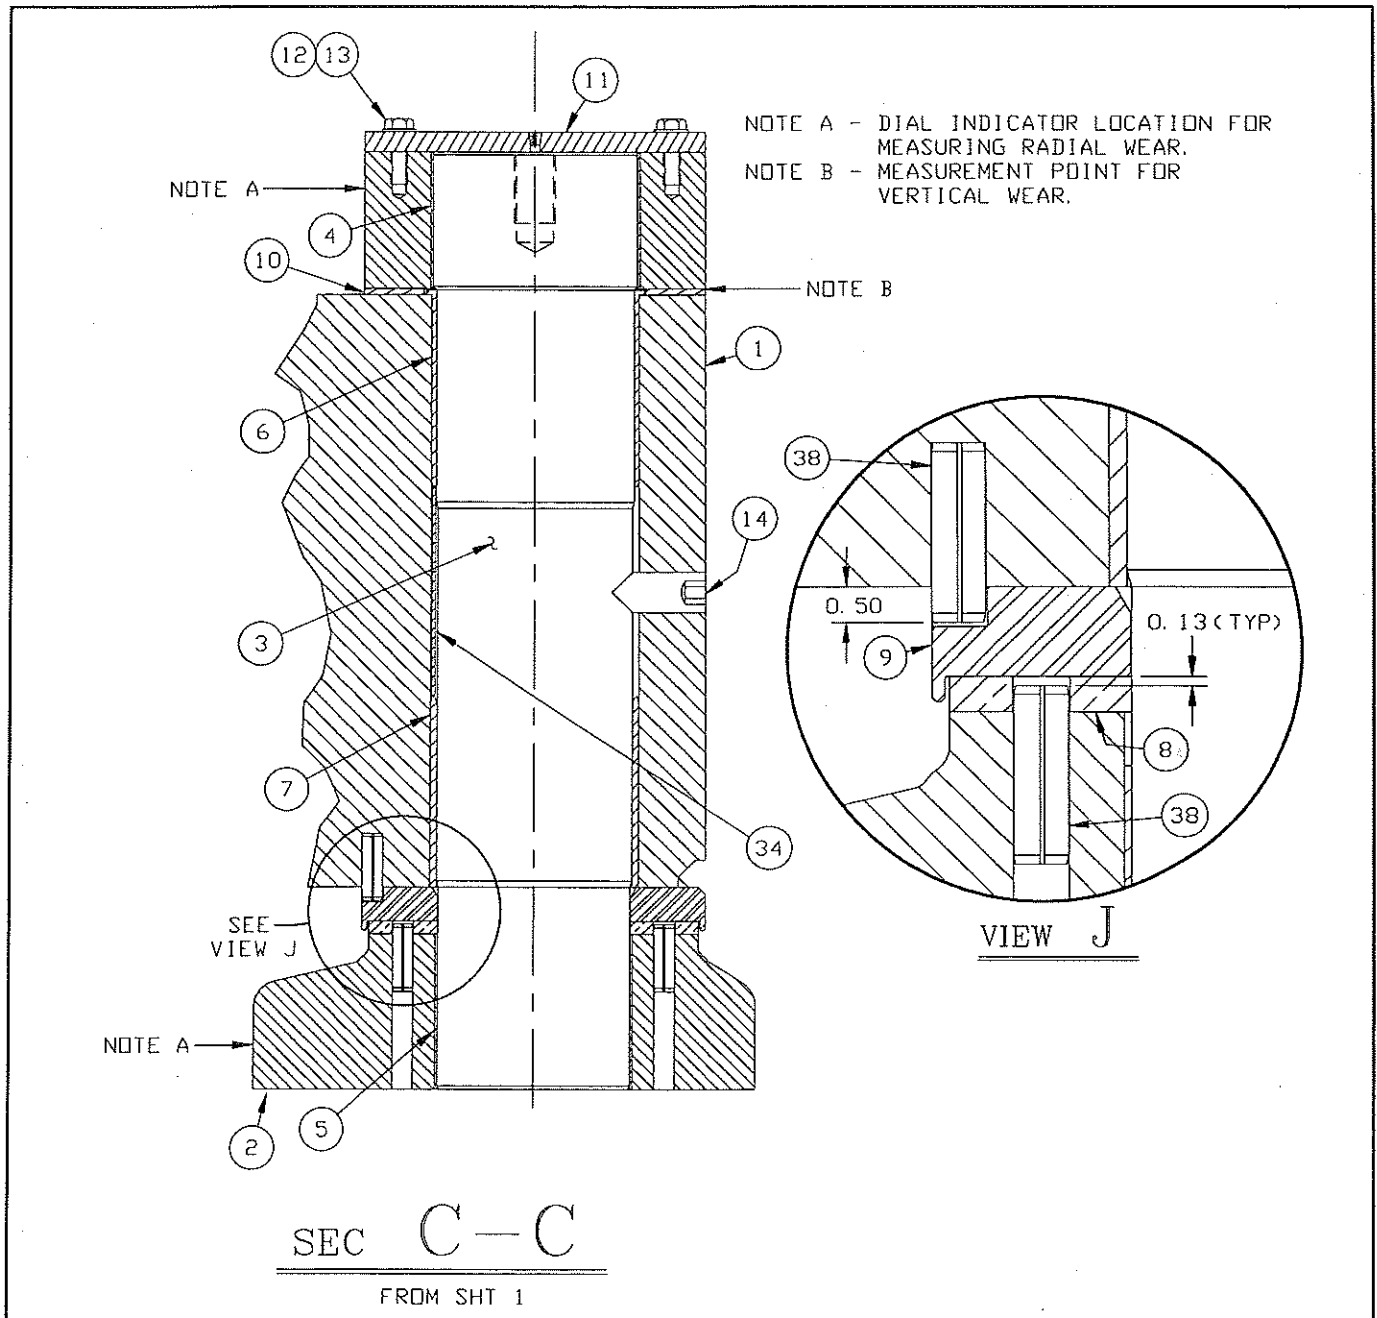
FRONT AXLE ASSEMBLY (A85224, SHEET 4 OF 4)
